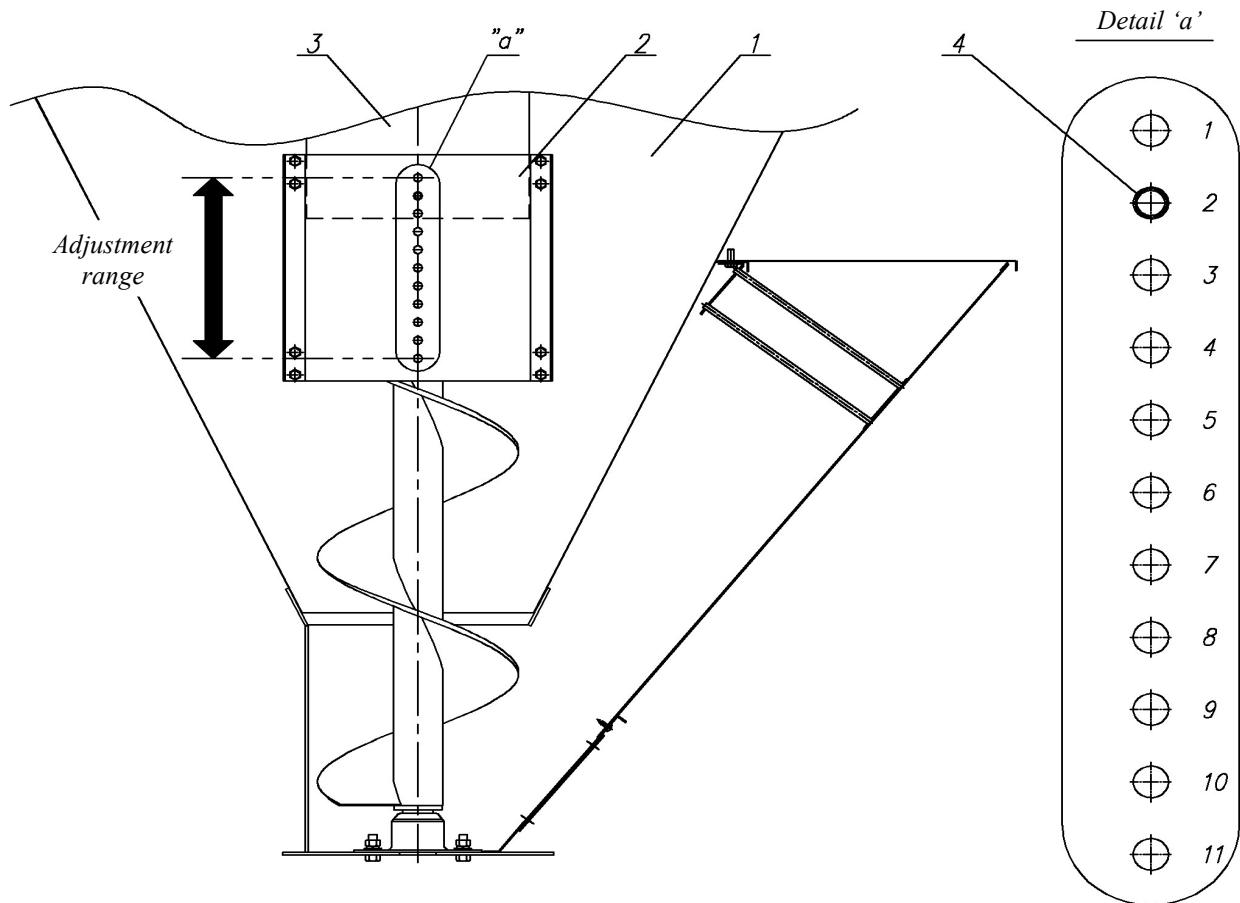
Adjustment of the screw housing: 1 – mixer MS, 2 – adjustment cover, 3 - screw housing, 4 – location pin.
